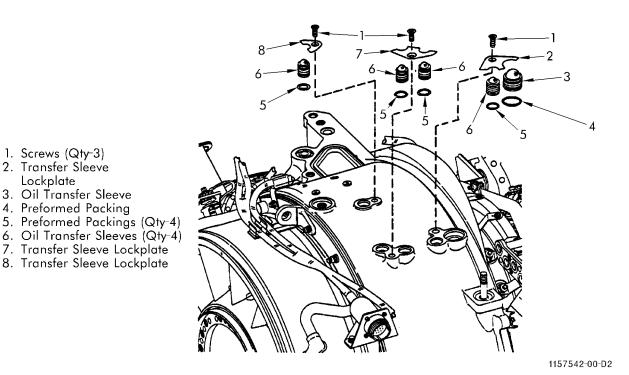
Oil Transfer Sleeves; Removal and Installation
